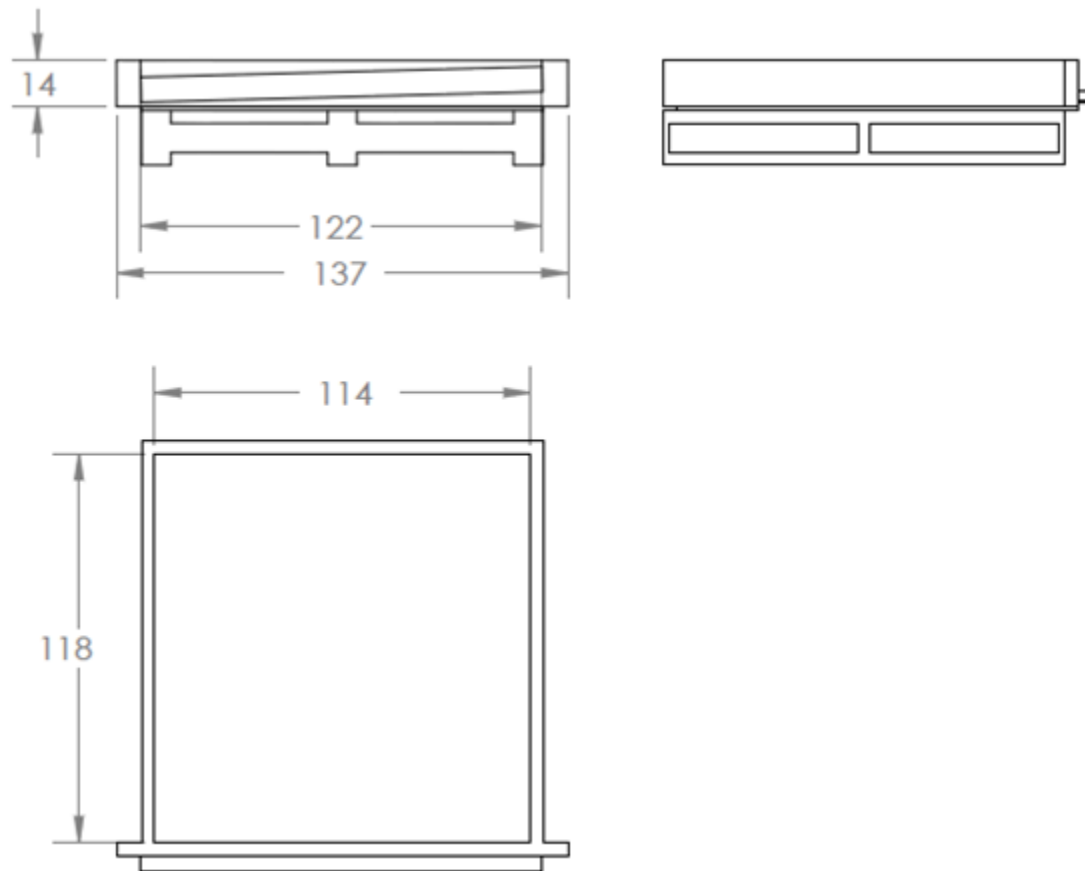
Soil erosion box dimensions (dimensions are in cm)
